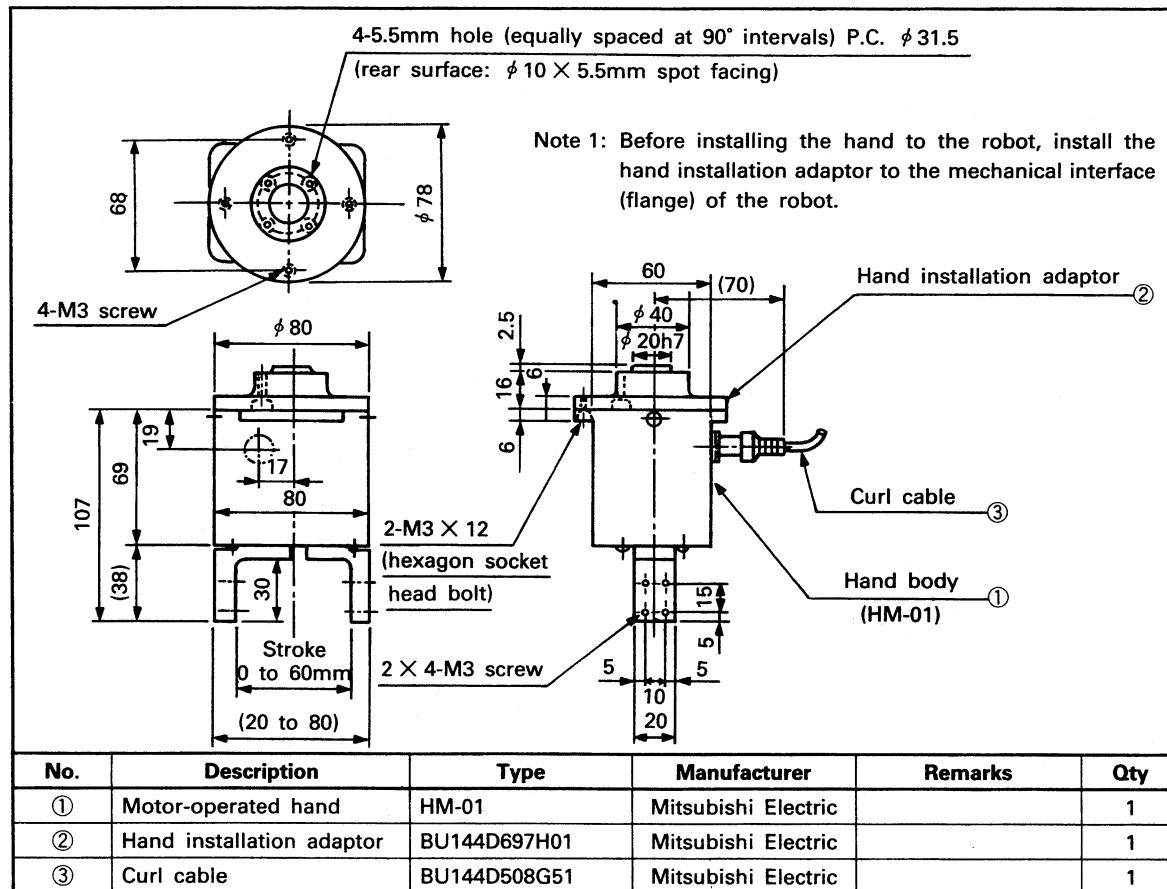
Motor-Operated Hand Outside Dimensions and Components
